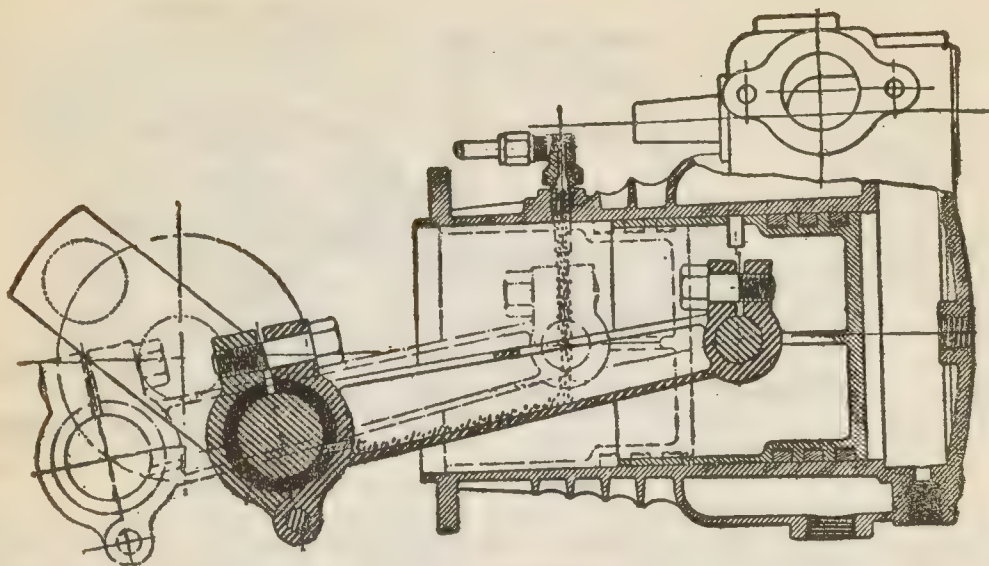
,108.—Horizontal cylinder oiled by force feed oiler distributor. The piston is oiled when passing under oil port, as shown by the dotted outline. The connecting rod is longitudinally grooved on the upper surface, so as to carry oil to the bearings.
